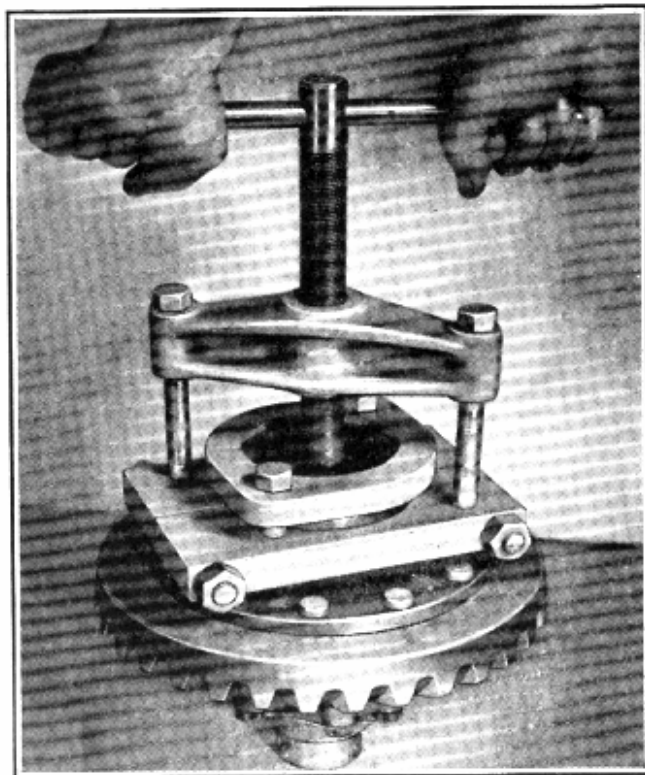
Removing the Differential Side Bearings With Puller No. CS-1047
